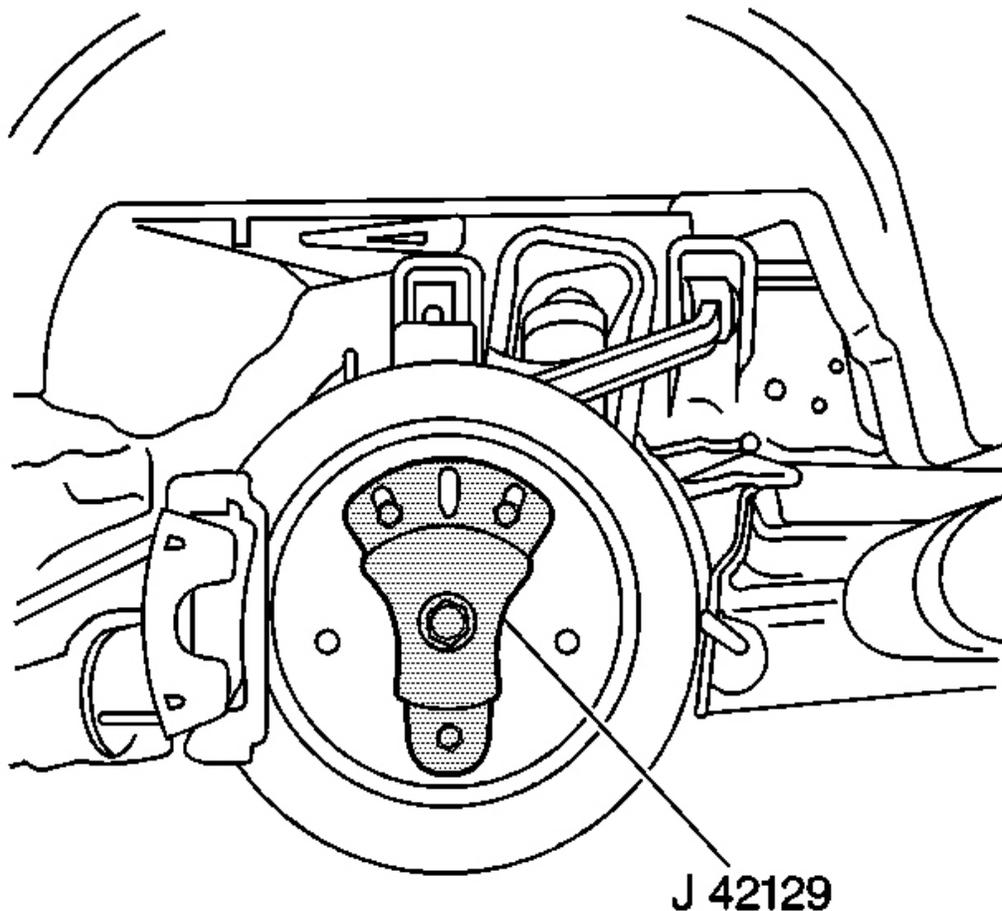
Installing J 42129 To Wheel Hub & Bearing
